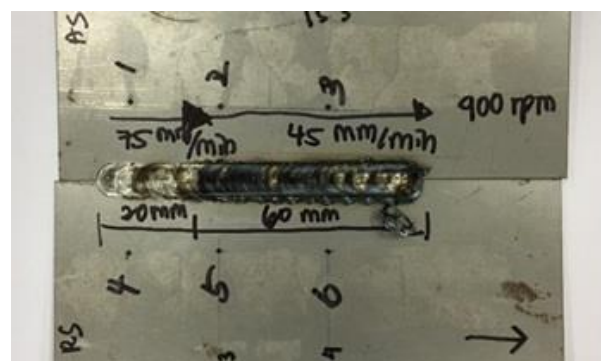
Visual inspection of this study; 900rpm with 75mm/min and 45mm/min.
